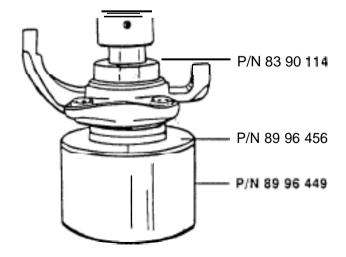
Place the steering knuckle on a press and press the bearing into contact with the outer snap ring.
